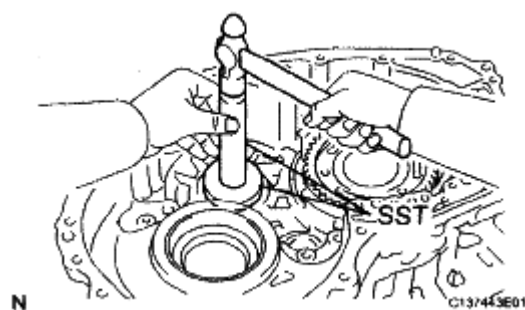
Installing Counter Driven Gear Rear Tapered Roller Bearing Outer Race To Transaxle Case
